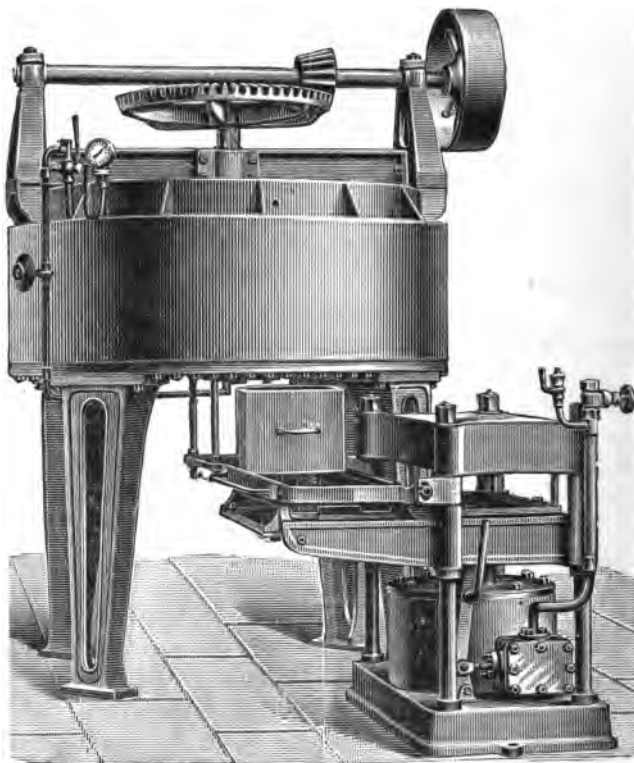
STEAM KETTLE AND MOULDING MACHINE.
